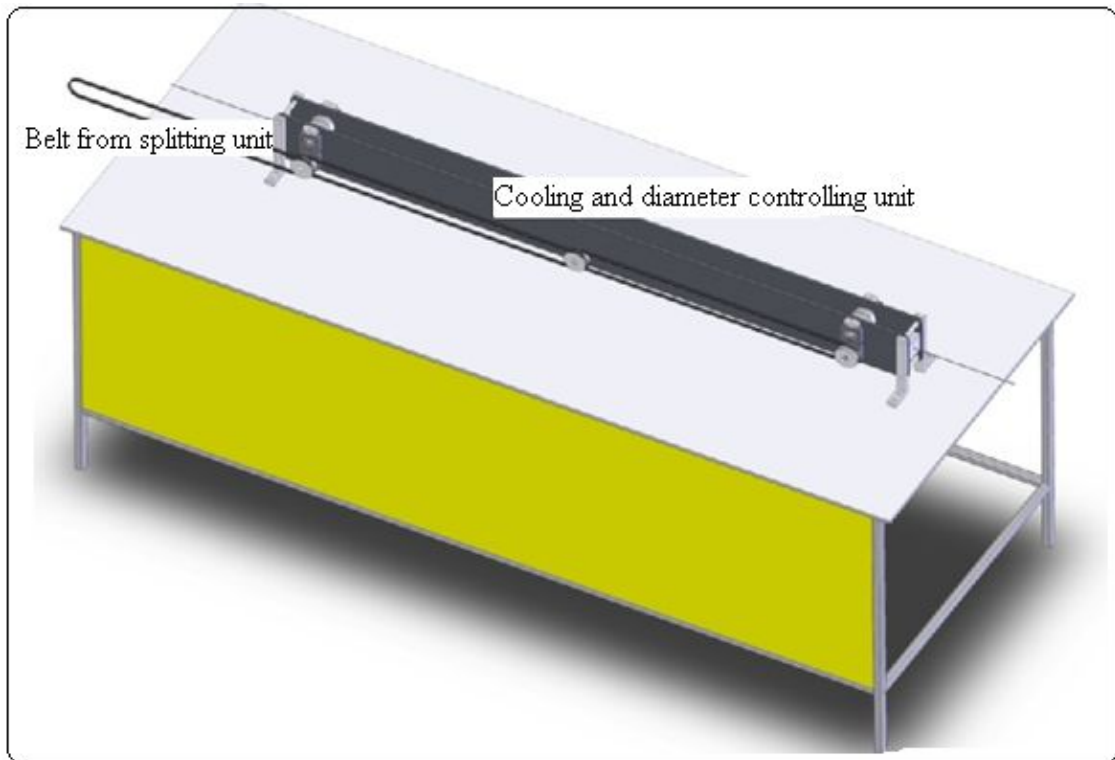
(b) Isometric view describing the second stage of the machine
